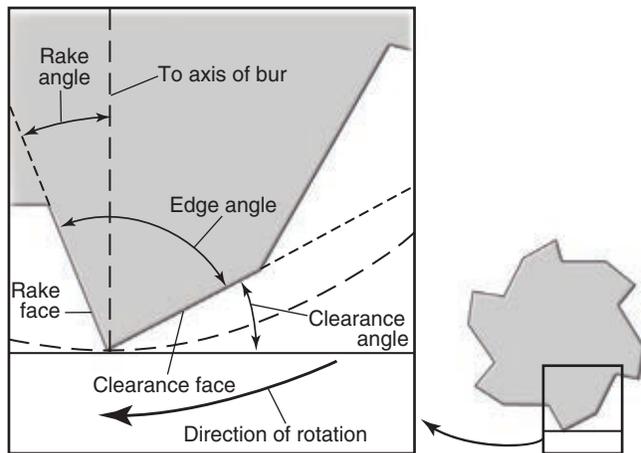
Bur blade design. Schematic cross-section viewed from shank end of head to show rake angle, edge angle, and clearance angle.
